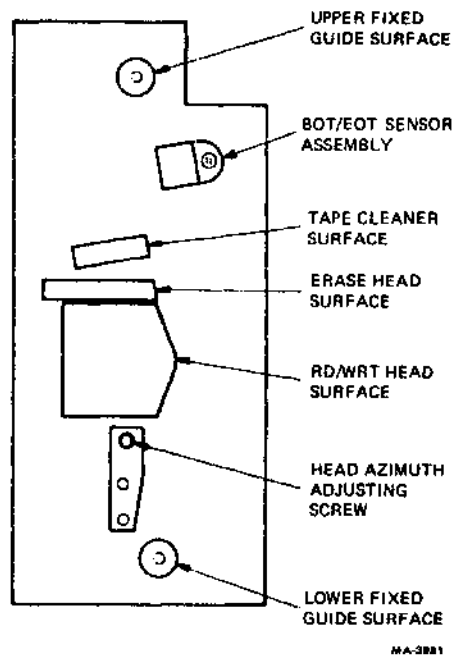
BOT/EOT Sensor and Head Skew Adjustment
